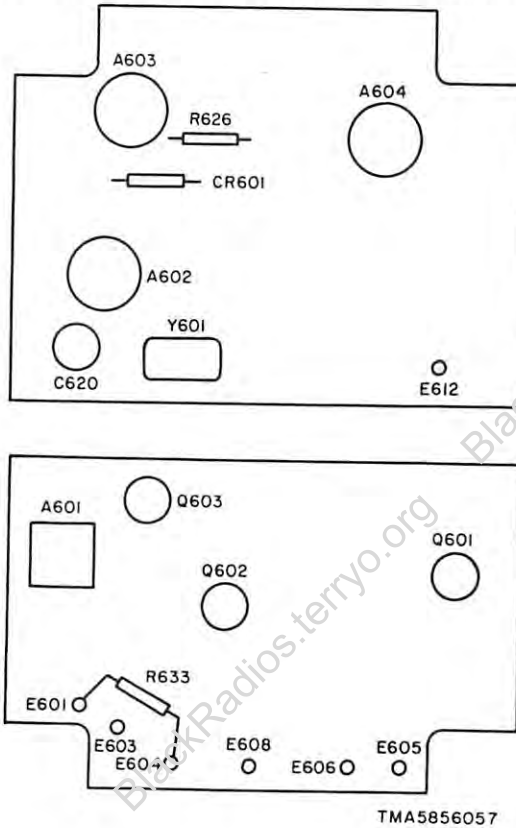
1 MHz AMPL AND CALIBRATOR ALIGNMENT PARTS LOCATION
